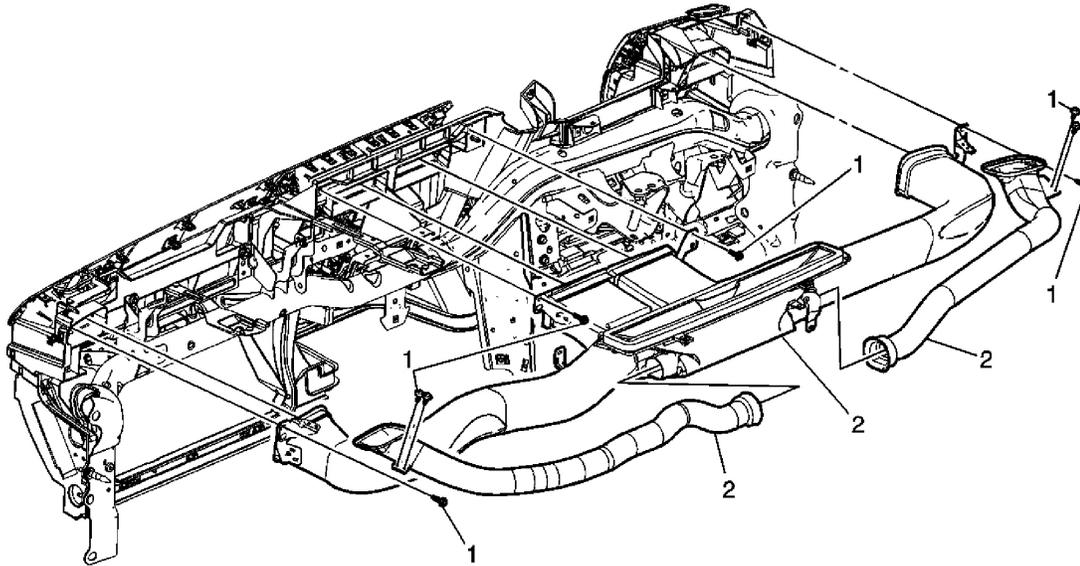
View Of Air Distributor Duct, Bolts & Rivets
